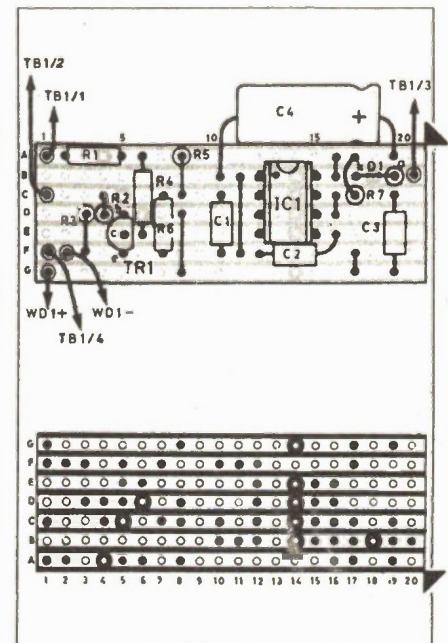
Circuit board component layout and details of breaks to be made in underside copper tracks.
